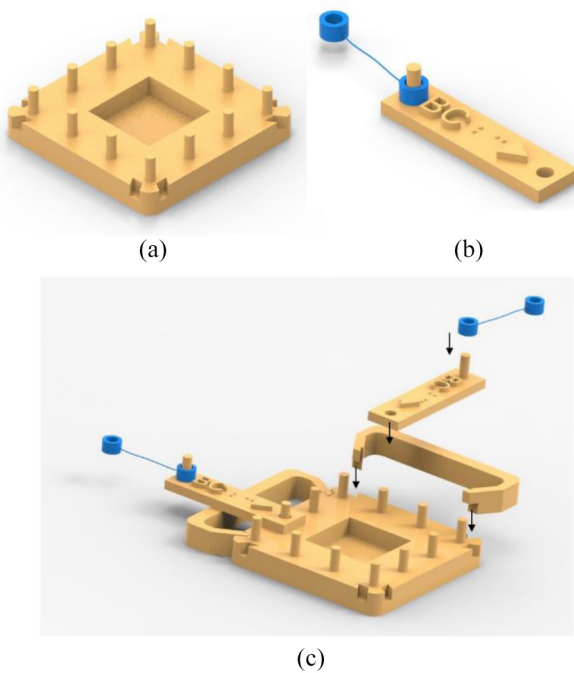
(a) Updated frame constructor 12 pins case, (b) connector constructor with label and direction arrow, and (c) label assembled to frame constructor supported by the removable support, and same parts showing the assembling process.
